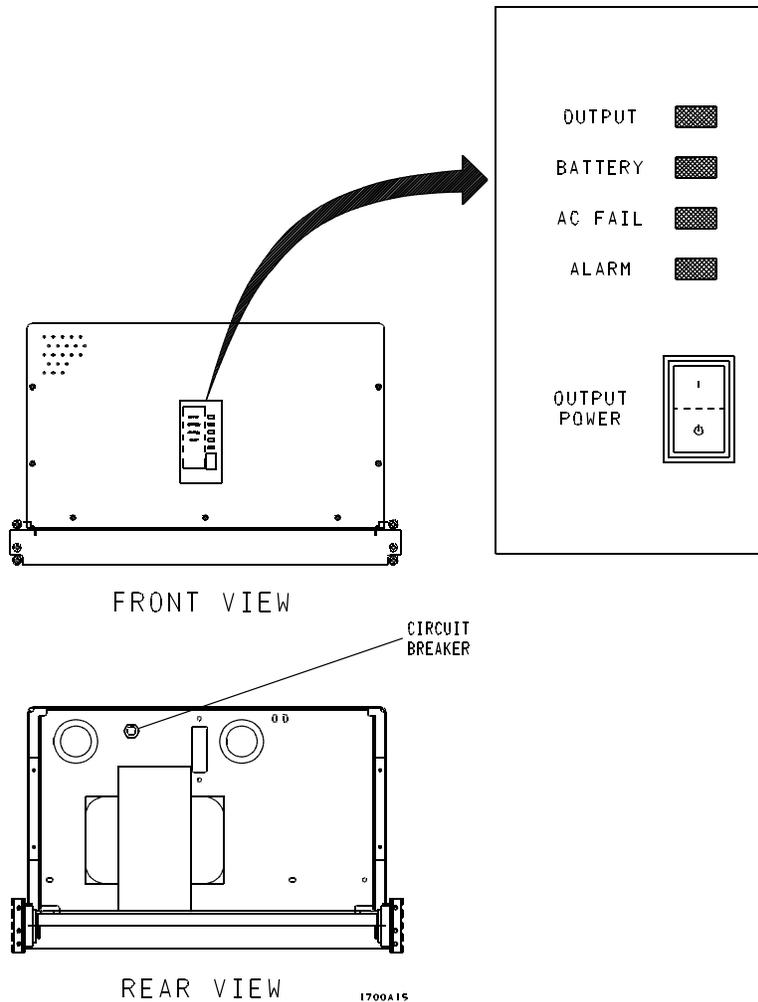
Power Supply Assembly 62828-40124-10 Controls and Indicators
